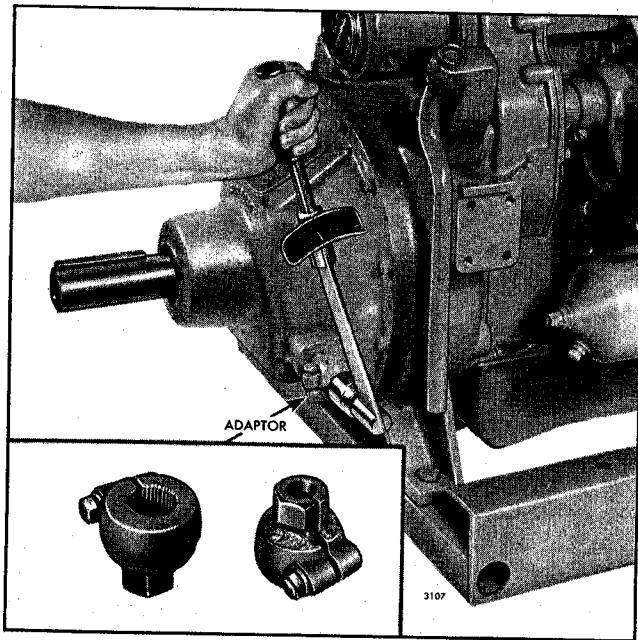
Checking Power Take-Off Clutch Adjustment with a Torque Wrench and an Adaptor
